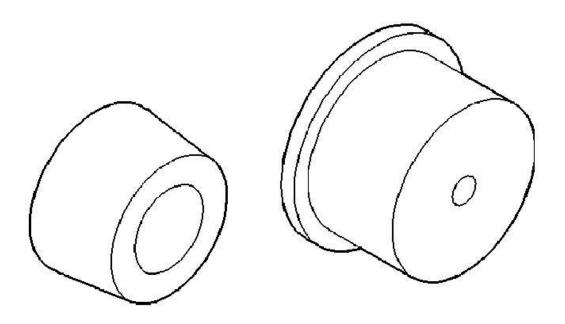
Crankshaft Rear Seal Guide 6926-1 & Installer 6926-2 Courtesy of CHRYSLER LLC
